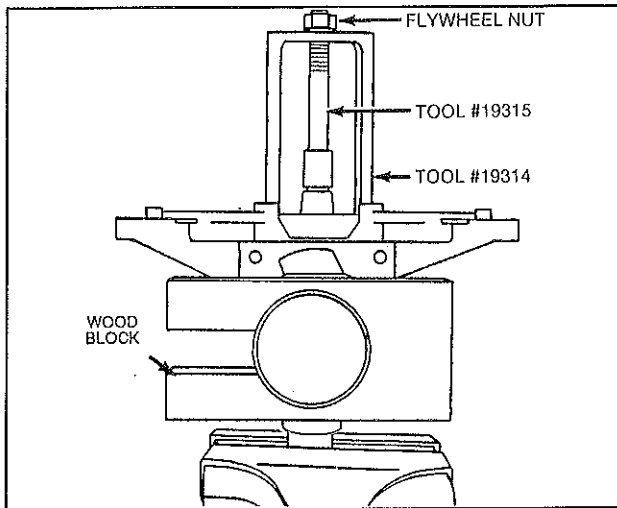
Installing Crankshaft, Magneto Crankcase Half (Typical)
